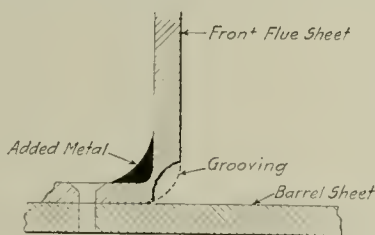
Repairing Grooved Tube Sheet Knuckle
